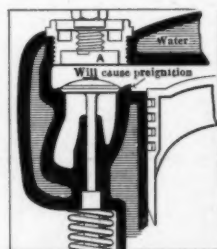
Section of a motor cylinder showing a projecting fin around the valve seat such as will cause pre-ignition.
